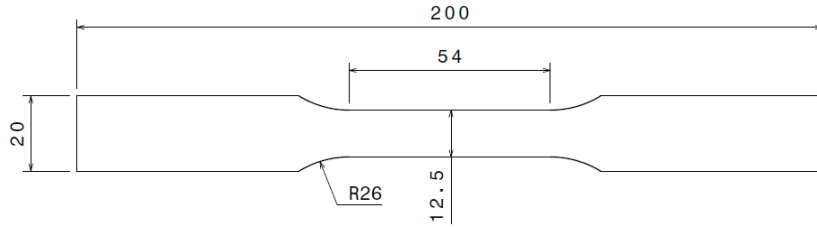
Specimen dimensions of the QS tensile test coupons as per ASTM E8.
